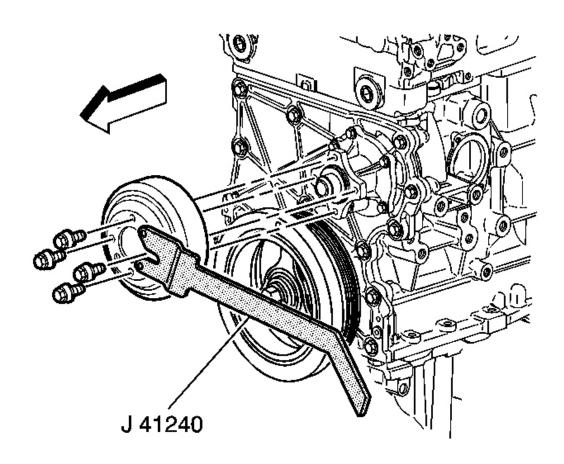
View Of Water Pump Pulley, Bolts & J 41240 Courtesy of GENERAL MOTORS CORP.
